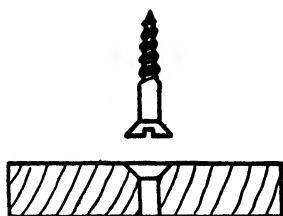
Checking the countersunk hole for depth by trying the screw upside down in the hole.
